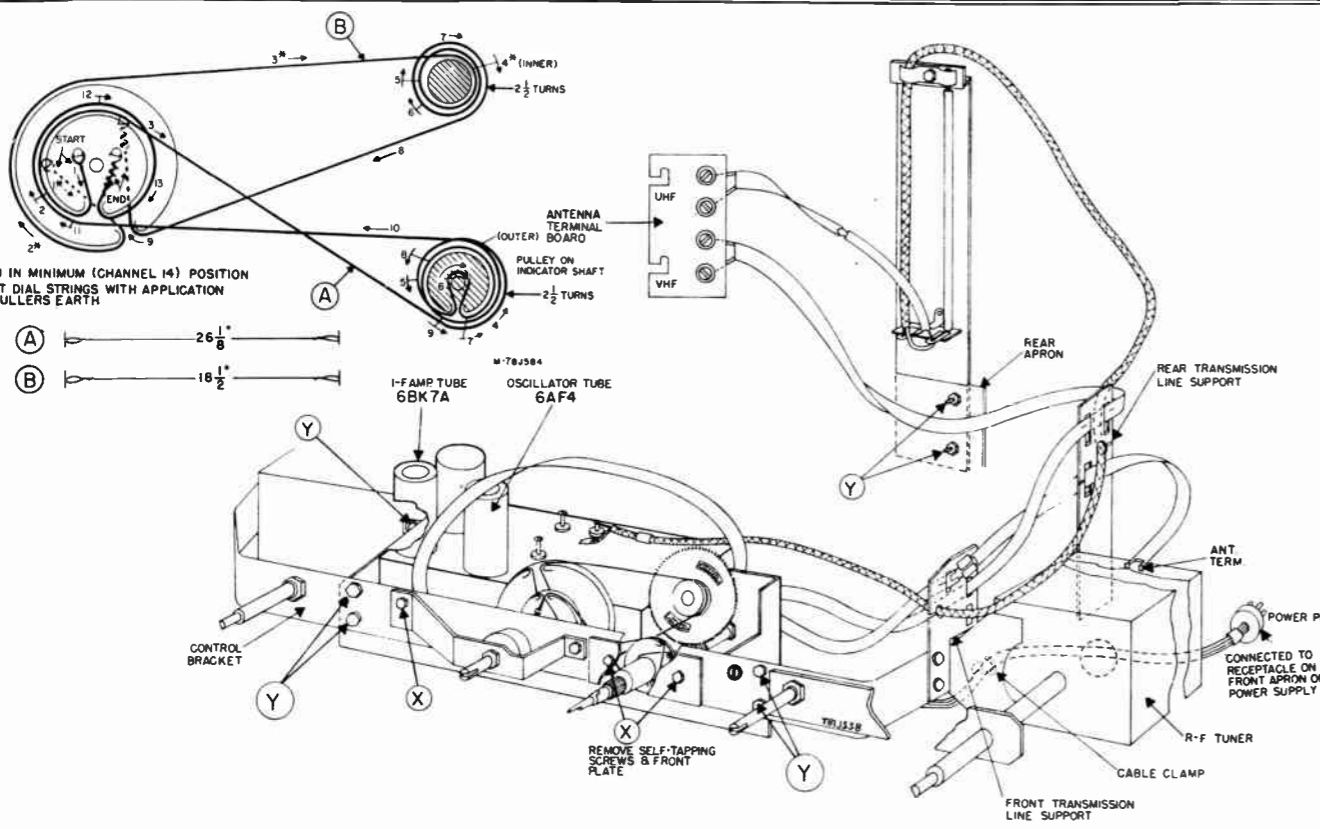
UHF-90 Tuner Assembly and Wiring & Dial Stringing Diagram
